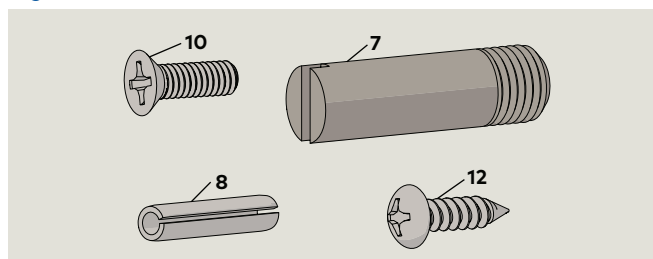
Three wing center shaft assembly RS6042-001
